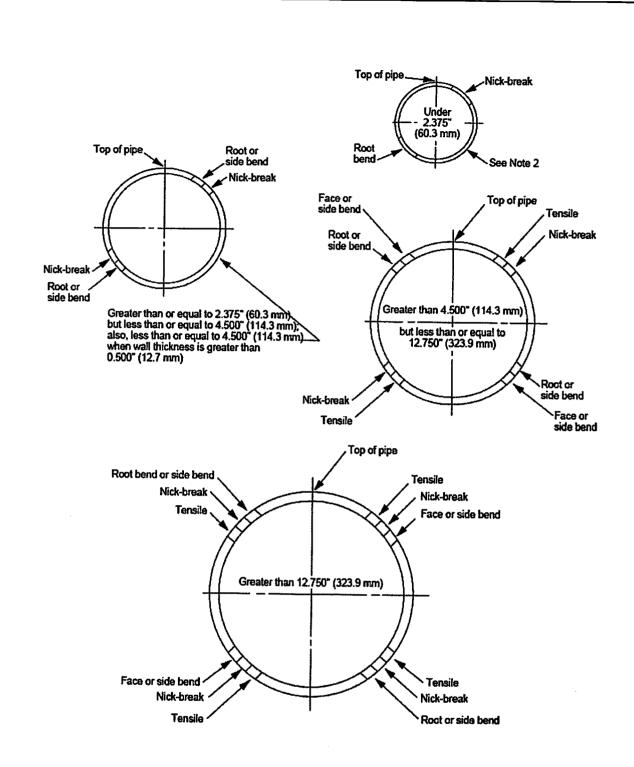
Location of Test Butt-Weld Specimens for Welder Qualification Test Note:
